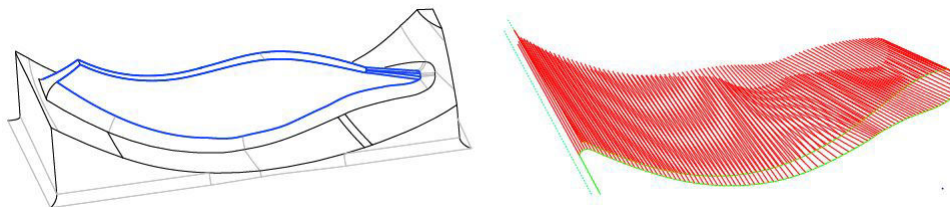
Definition of impeller surface and the machining trajectory [Pechard 2011]
